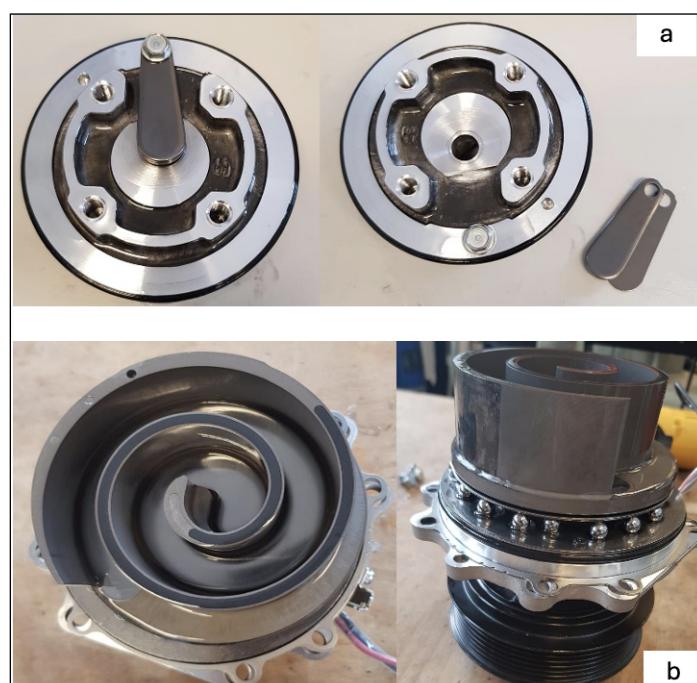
a) Before and after the removal of the check valve, b) Orbiting scroll and bearings.
